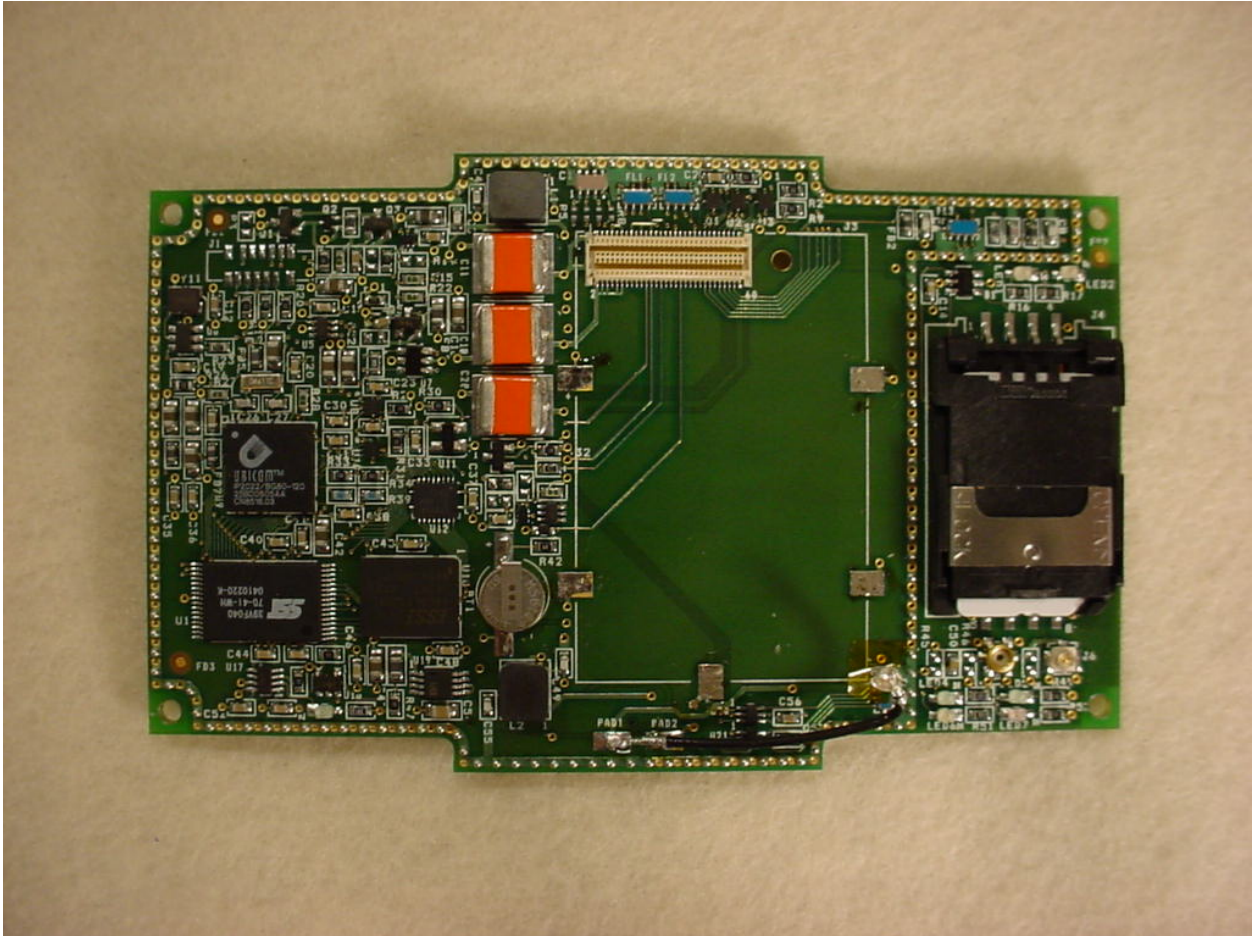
Internal – Mezzanine GPRS Board Front w/o Shields - GPRS Modem Removed (GPRS & GPRS + Ethernet Sub Assemblies Only)
